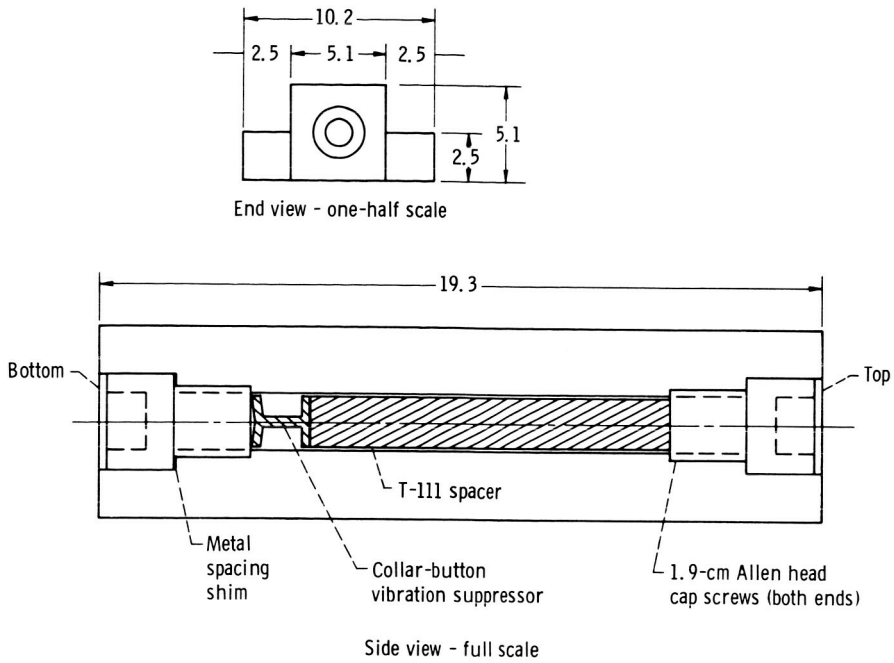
Complete test fixture with collar-button vibration suppressor. (Dimensions in centimeters.)
